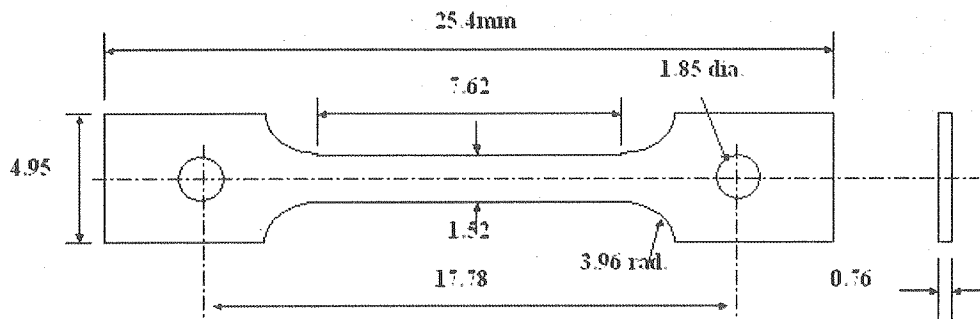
Tensile specimen geometry of SS-3 type.
